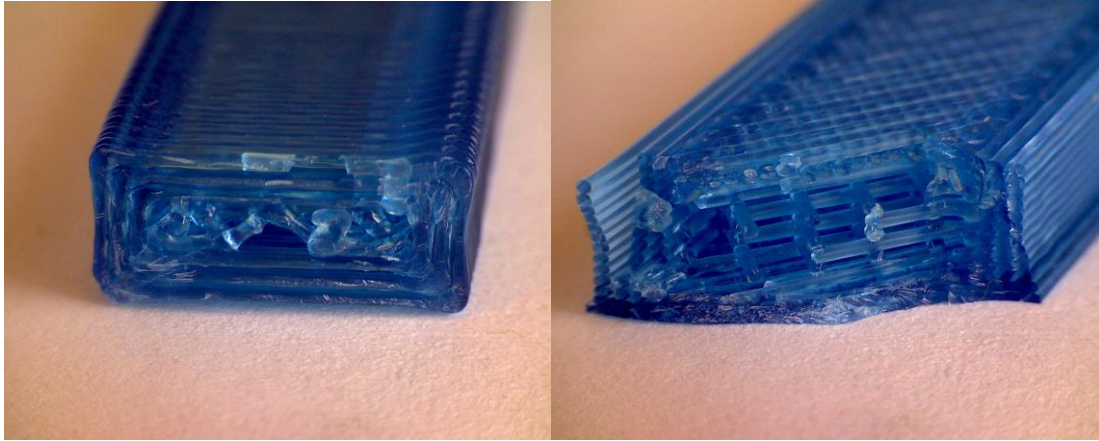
Fractures of PET. Printed standing to the left and flat to the right
